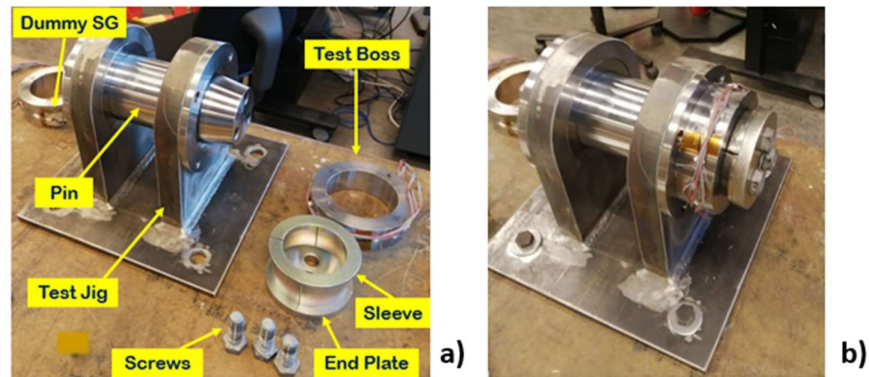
Test setup, (a) separate parts, and (b) installed
